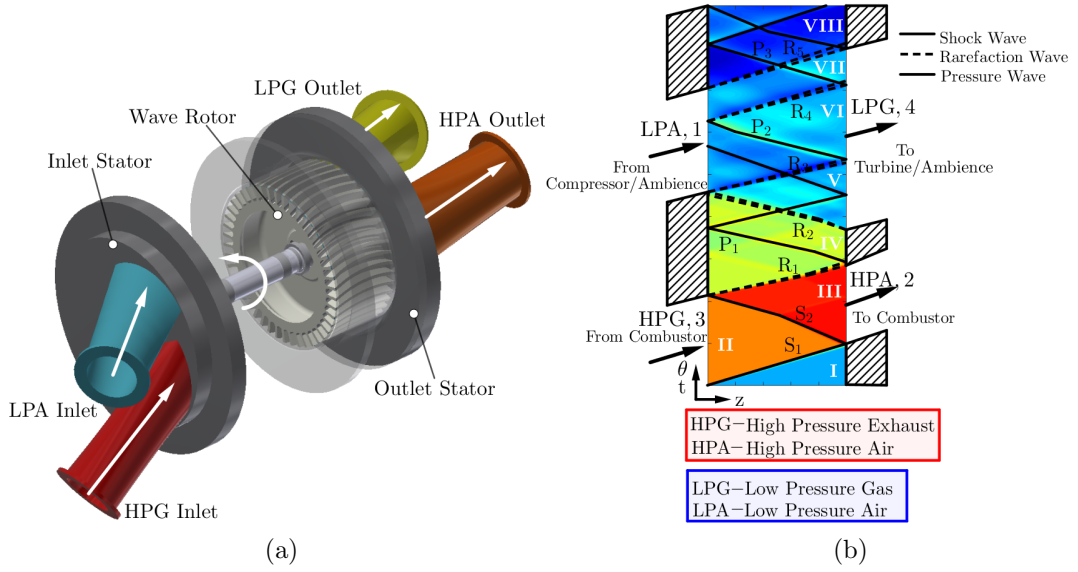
(a) Main components of a generic four-port, single cycle throughflow wave rotor consisting of inlet and outlet stator endplates and rotor/bearing assembly. (b) Unfolded view of the wave pattern experienced as a single channel passes through the port arrangement of a four-port throughflow wave rotor showed in the  $\theta$ - $z$  plane.
